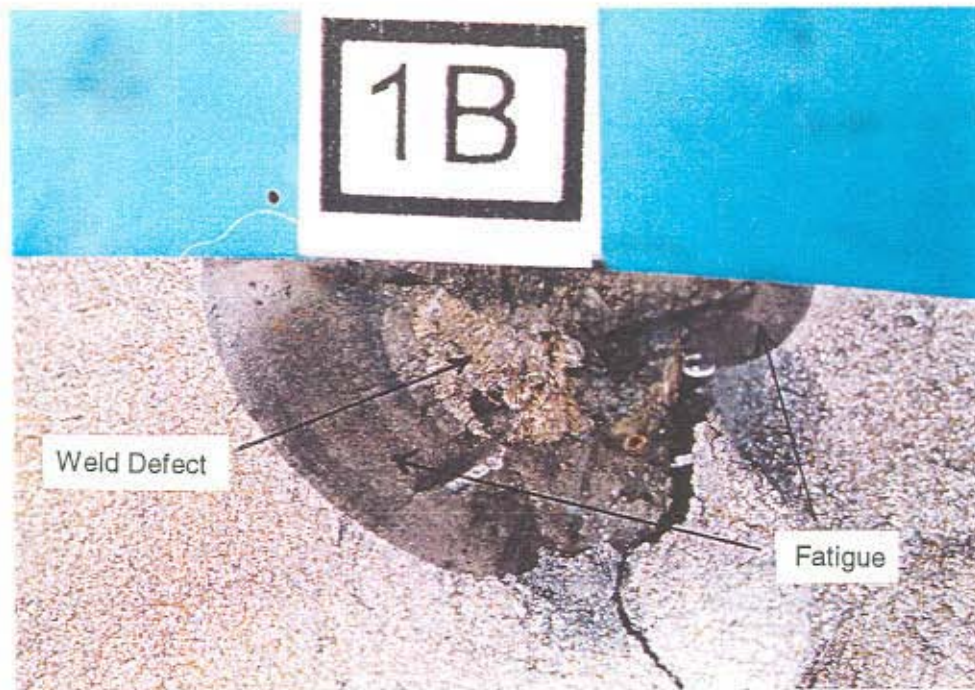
Crack Surface From Keyway 1B After Ultrasonic Cleaning of the Surface.
